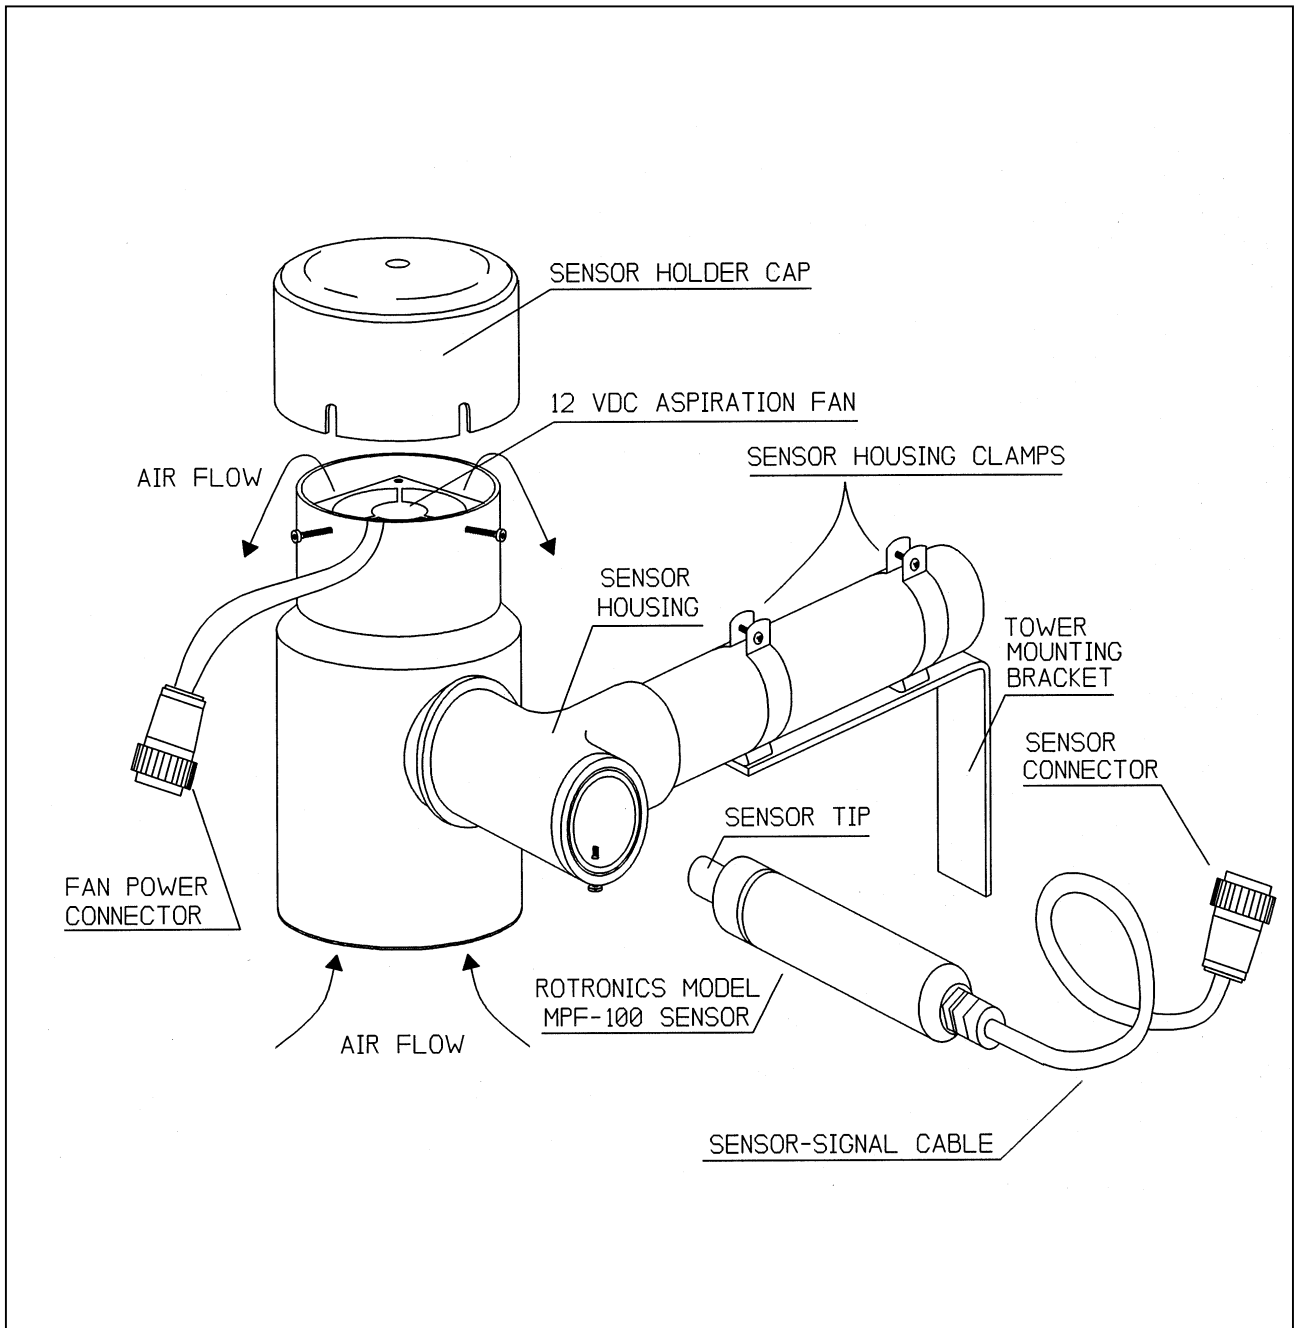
Rotronics AT/RH Sensor in Force-Aspirated Shield.
